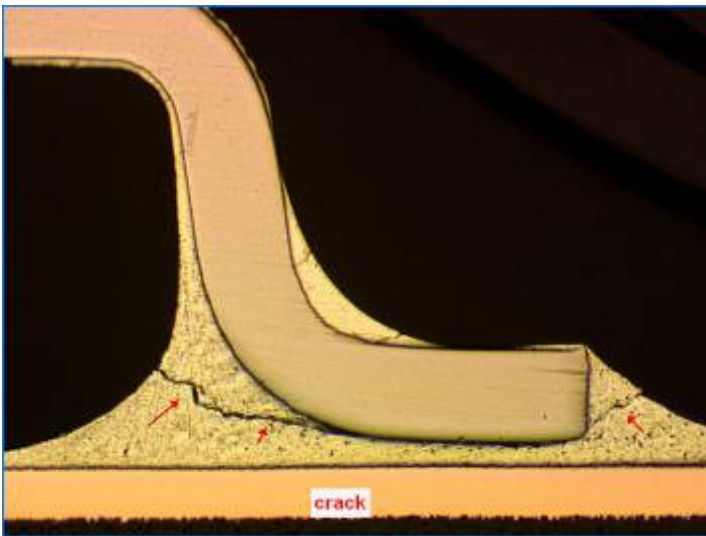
cross section, SN65, U62, right lead and solder crack, 100x
